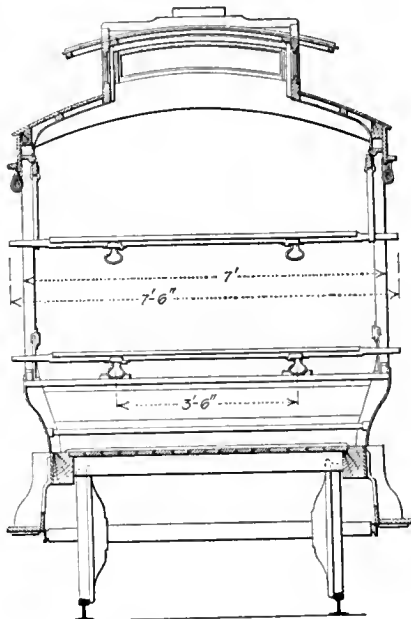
CROSS-SECTION OF AMBULANCE CAR, BOSTON ELEVATED RAILWAY
